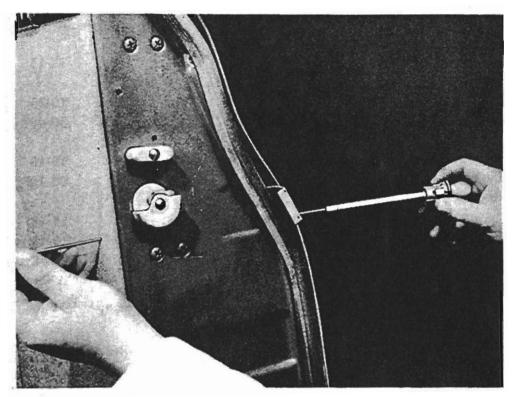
Using a Needle As a Guide, Push the Lock Shaft Into the Lock Assembly.
